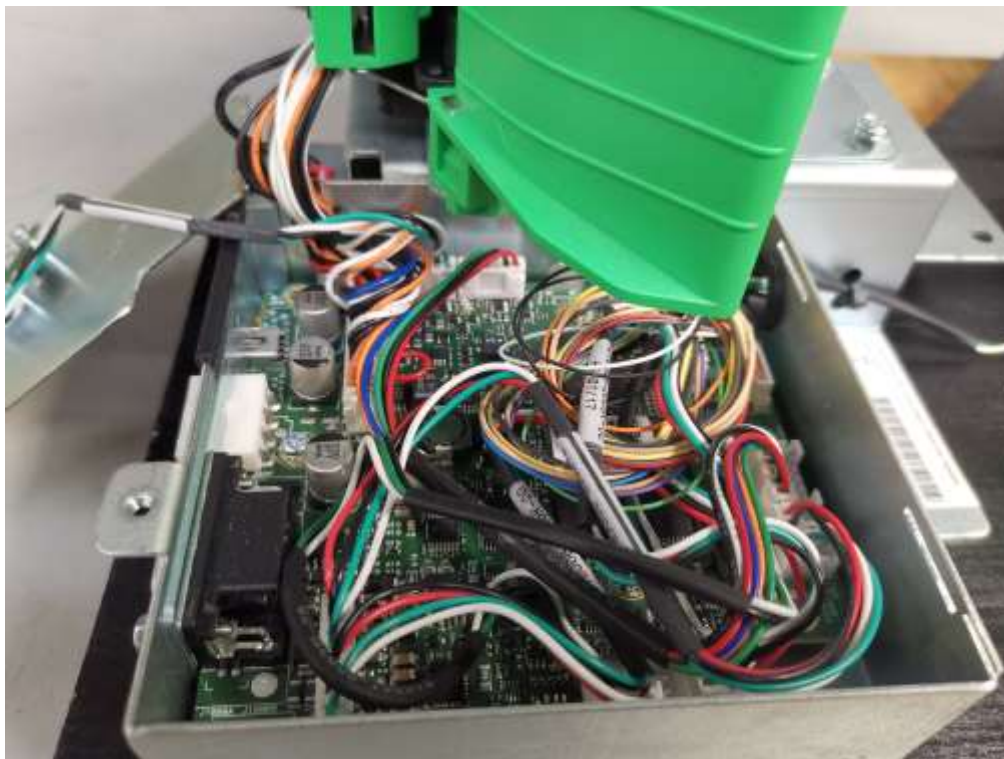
Top view of the main circuit board of thermal printer, P/N 950024
